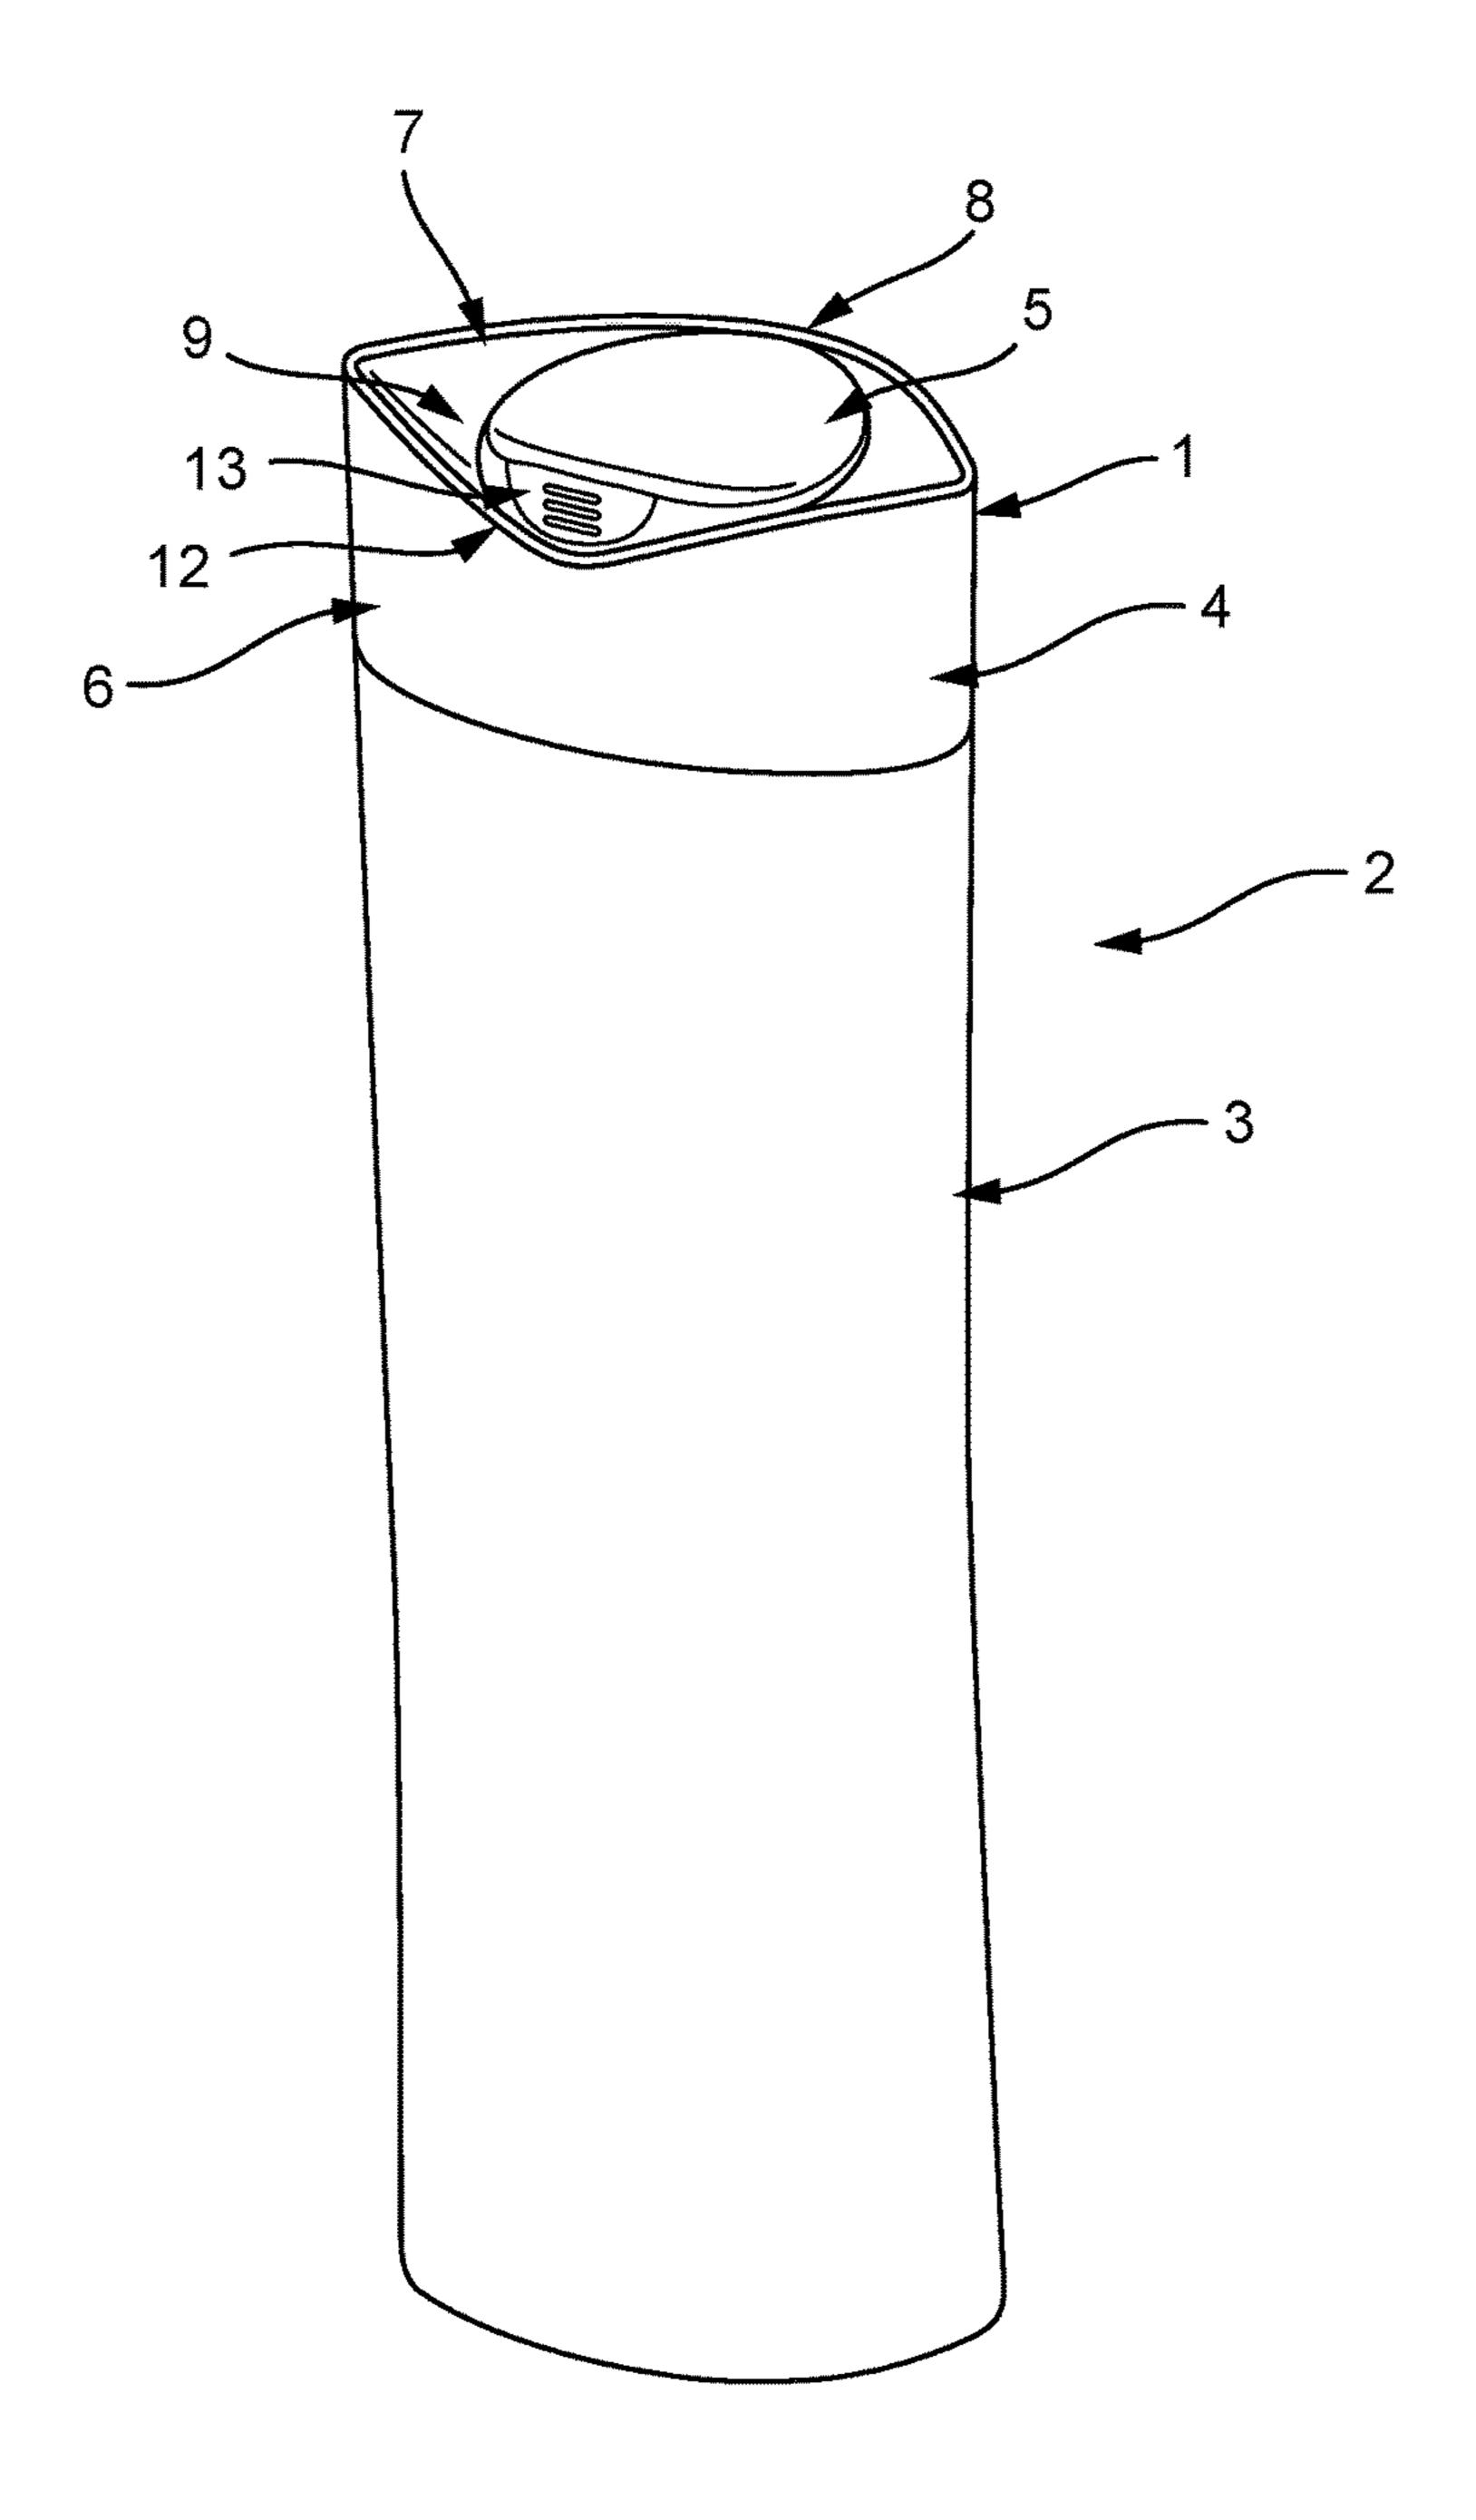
Perspective view of the container comprising the closure assembly mounted on the container body
